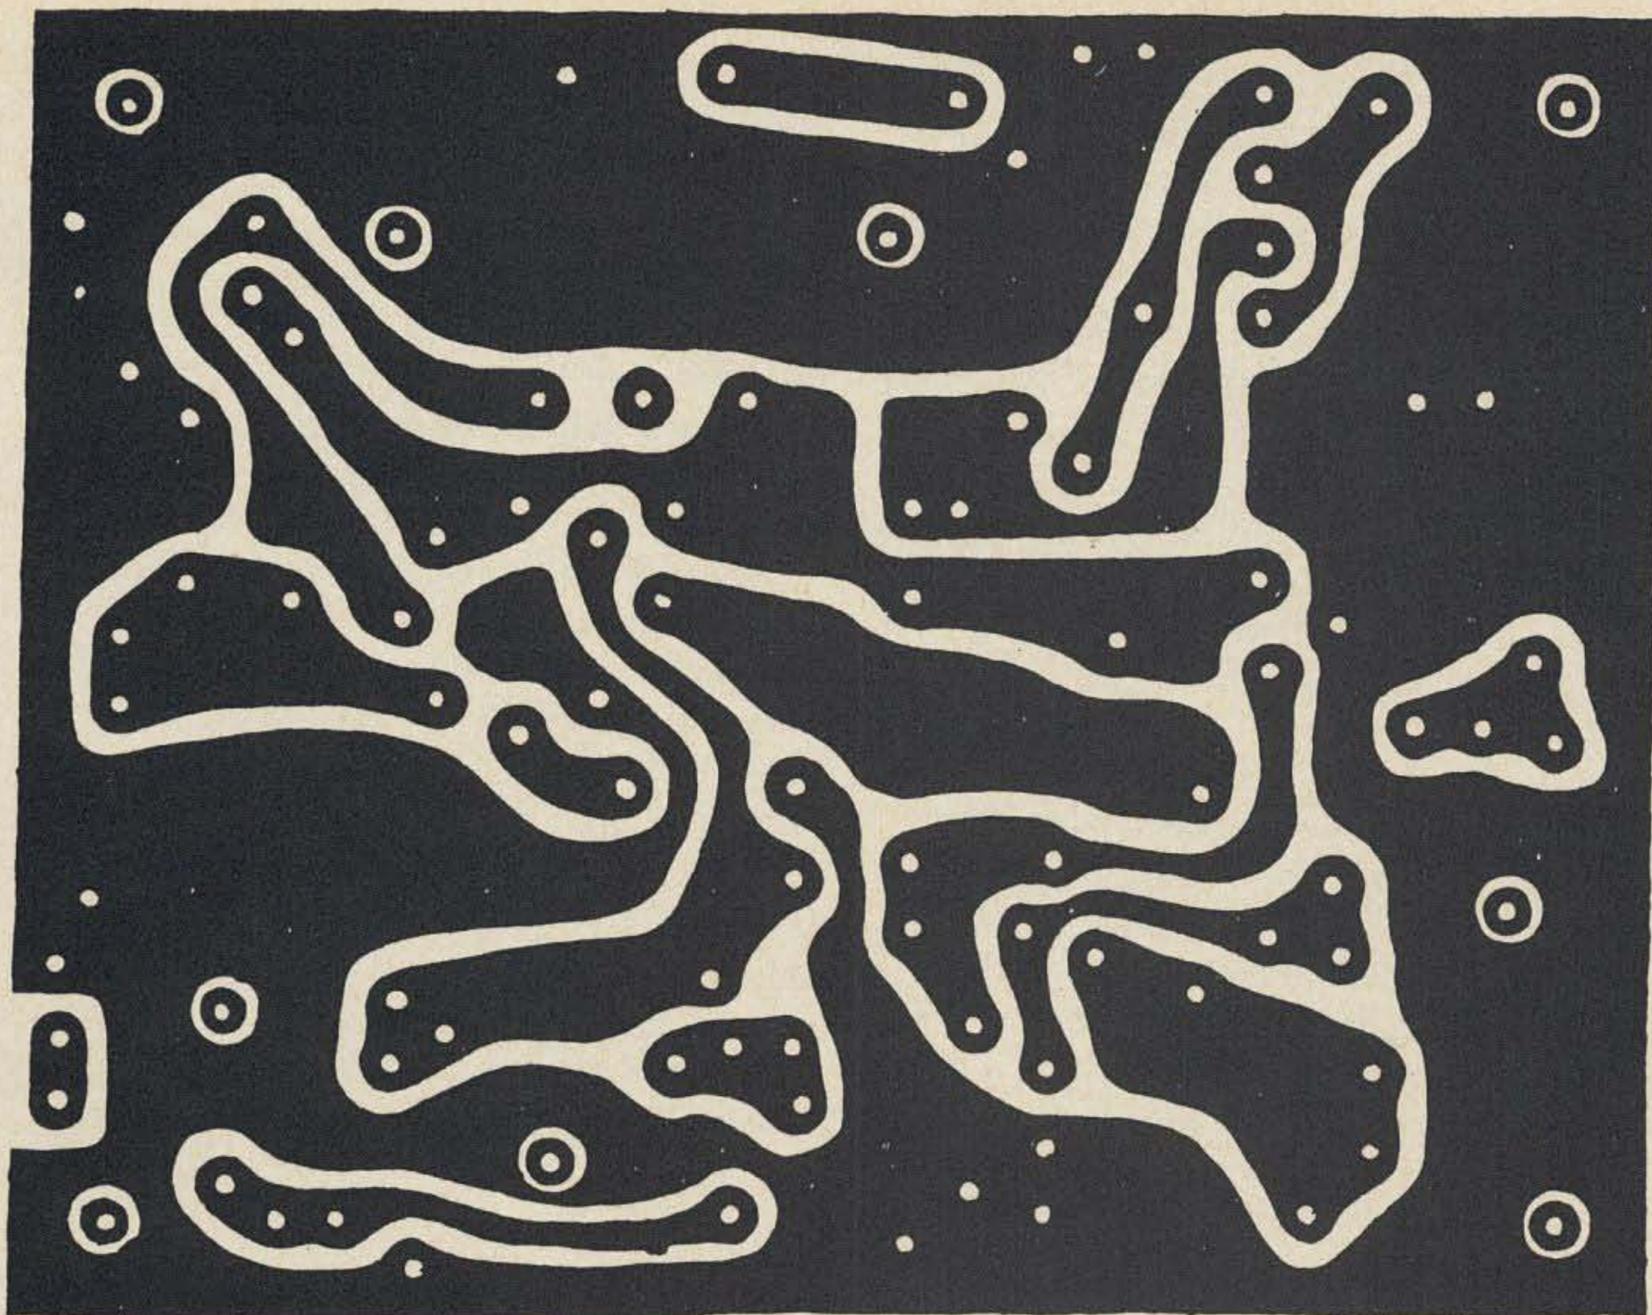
Double-size PC board layout for the rf/af section of the receiver.
